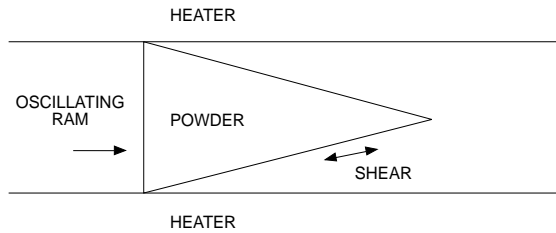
Unmelted Resin Cone in Ram Extrusion.
